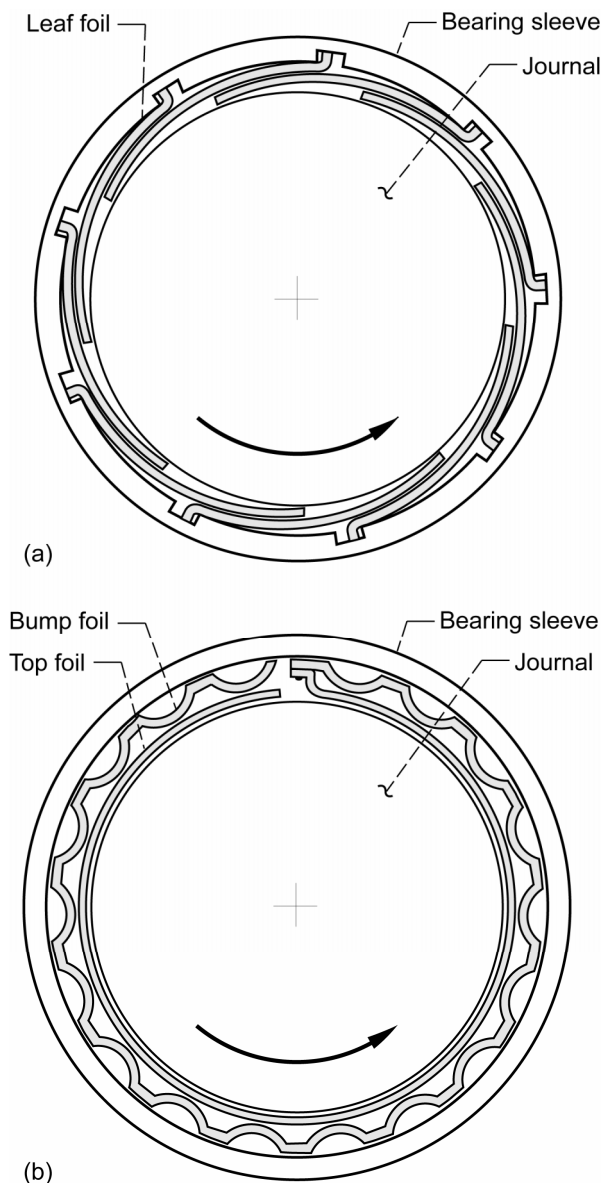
Early foil bearing designs. (a) Leaf-type foil bearing. (b) Bump-type foil bearing.
